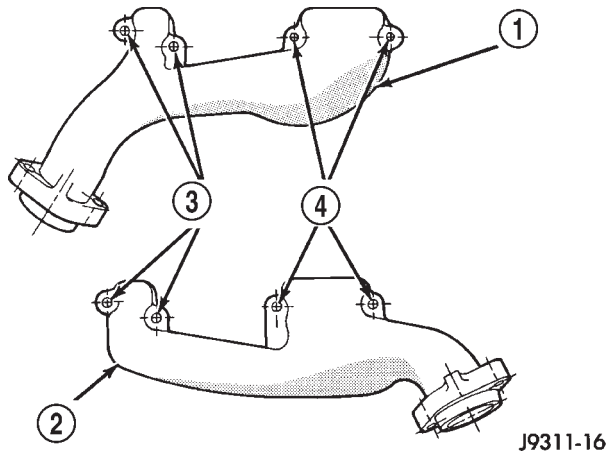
Exhaust Manifold Installation—3.9L Engine
